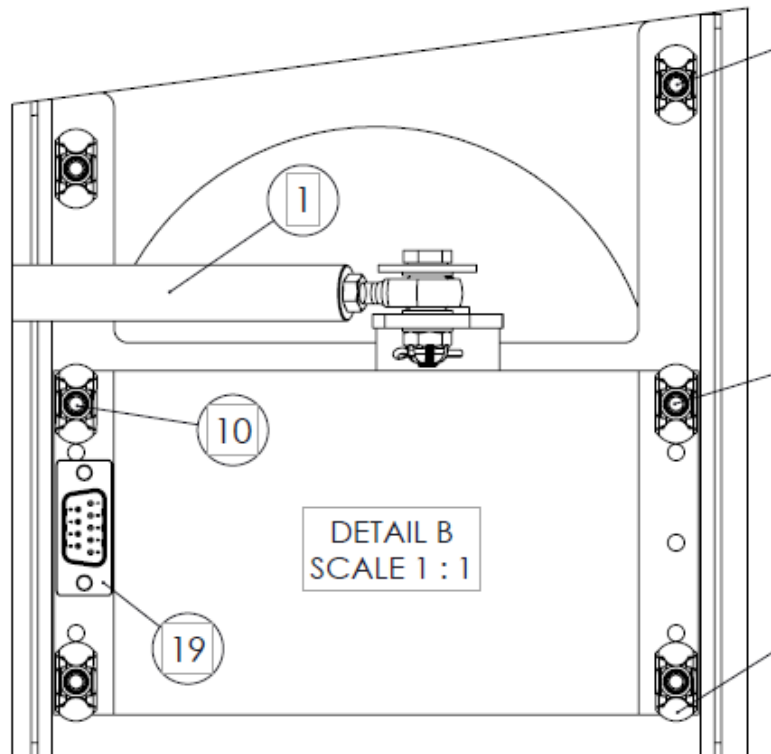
ROLL SERVO BRACKET ASSEMBLY
